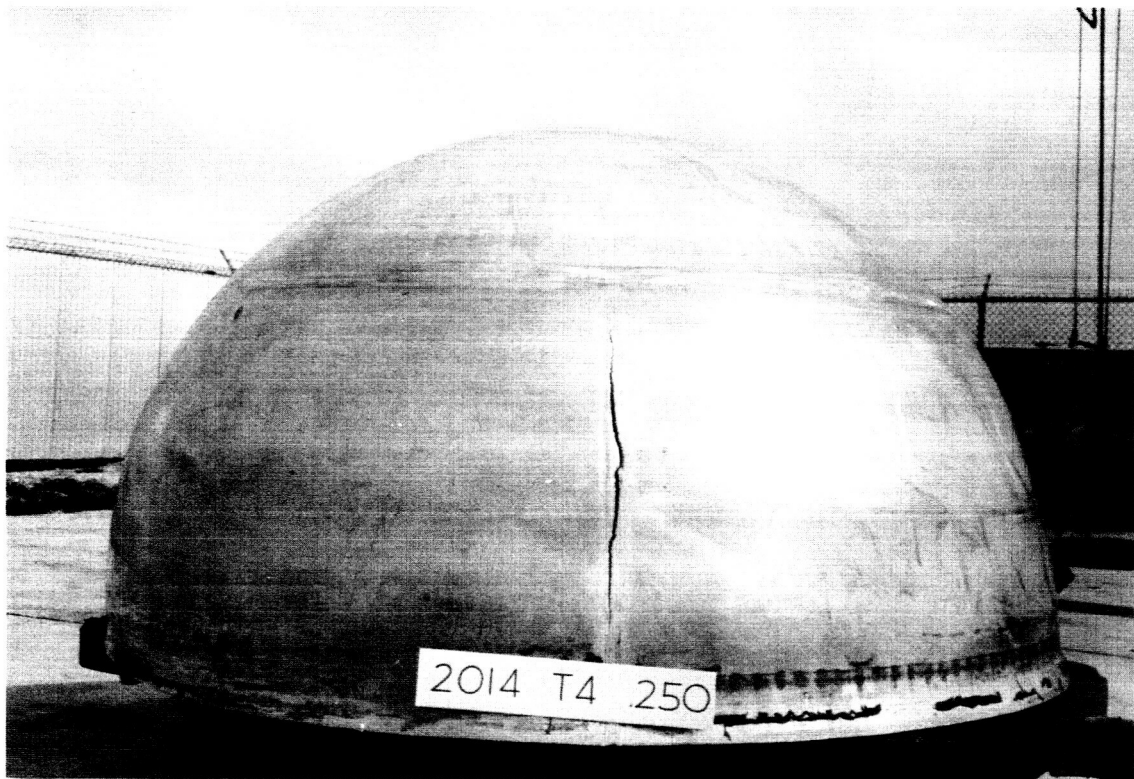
Figure VI Bulkhead No. 1 (Rotated 90°) - Showing Longitudinal Weld Failure. Not Visible are Intermittent Longitudinal Cracks Throughout Circumferential Weld.
